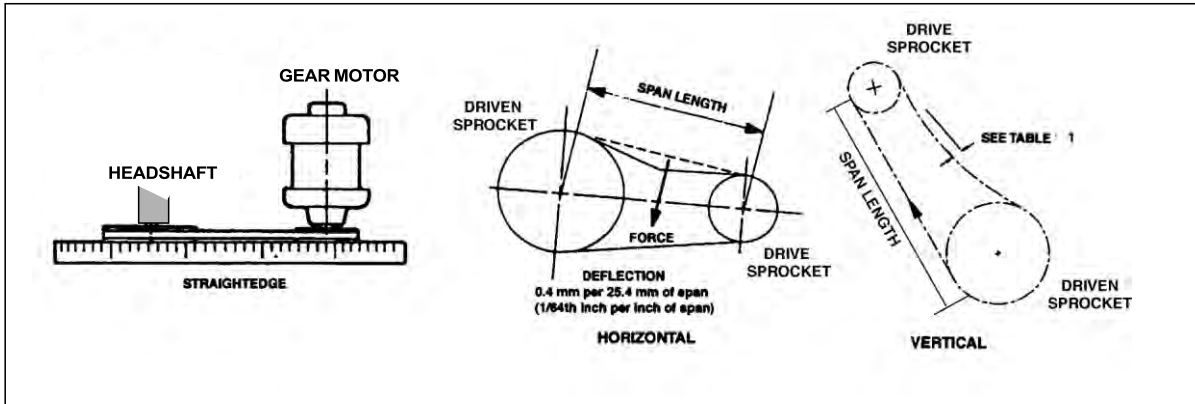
Gearmotor Alignment and Drive Chain Tension Adjustment
